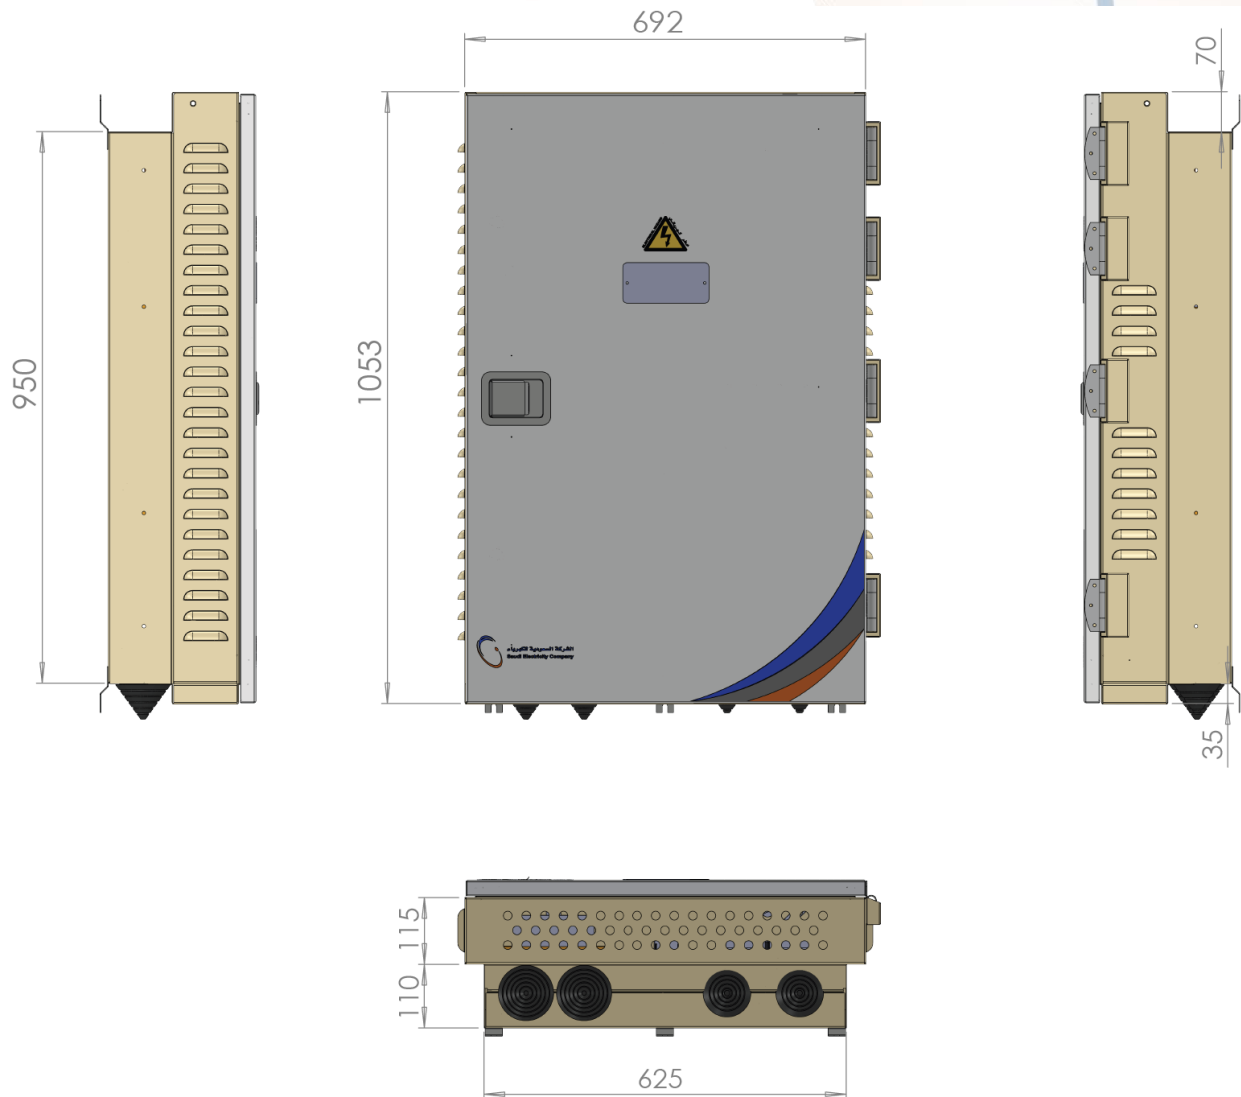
Perspective Drawing of a 300/400A and 500/600A-Meterboxes with Steel Enclosures
